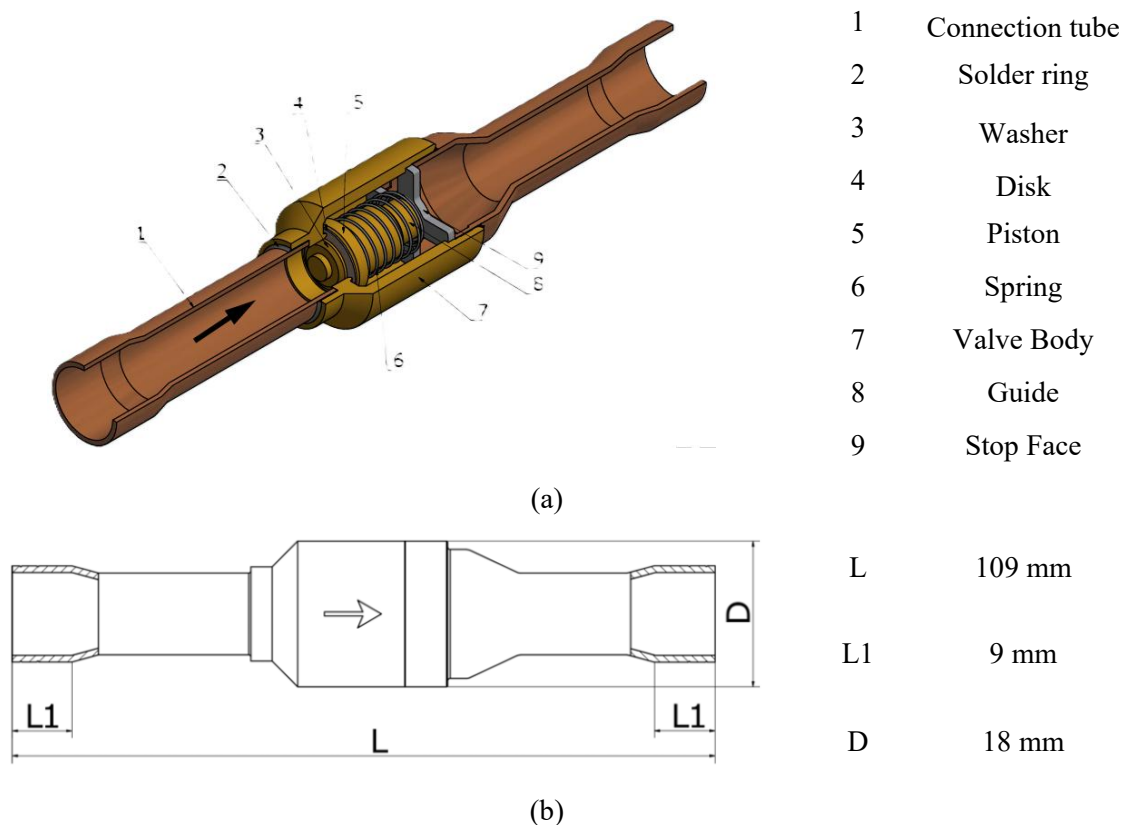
Different parts of Check Valve (a), Dimensions of Check Valve (b)
